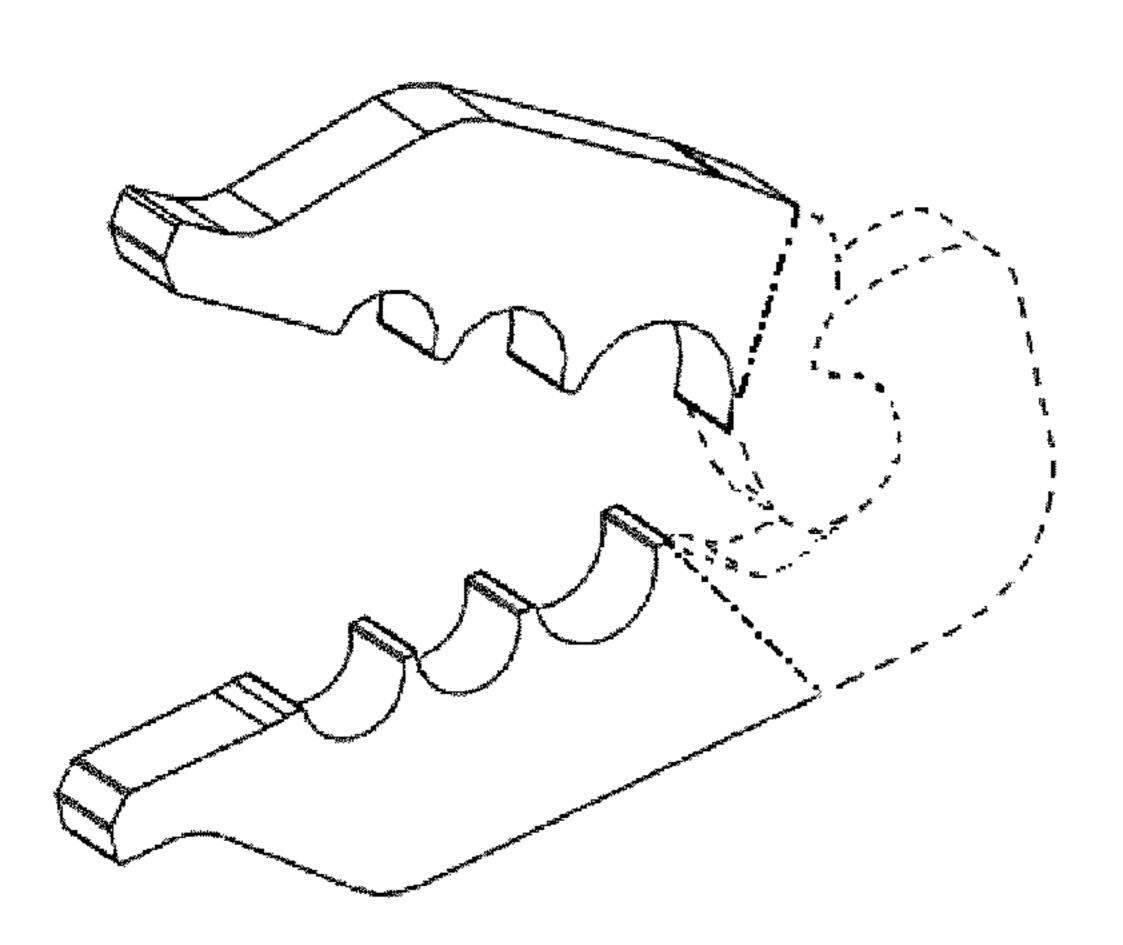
is a front right perspective view of the tool of FIG. 1 showing the design when the tool is in operation; and,
